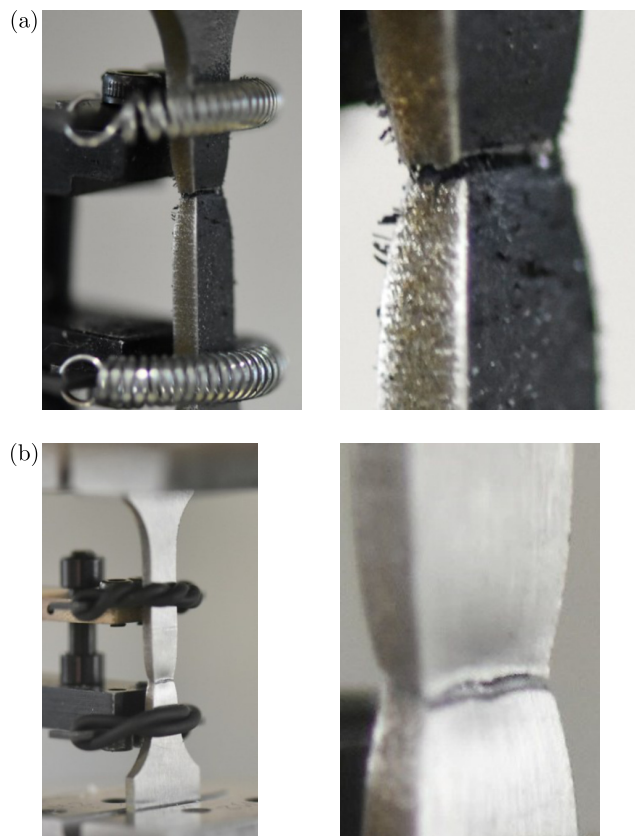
Flat specimens after the tensile test: (a) S700MC; (b) the welded steel.
